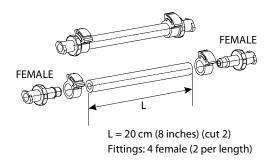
Set-up of pump inlet and outlet tubing, fittings and clamps.
